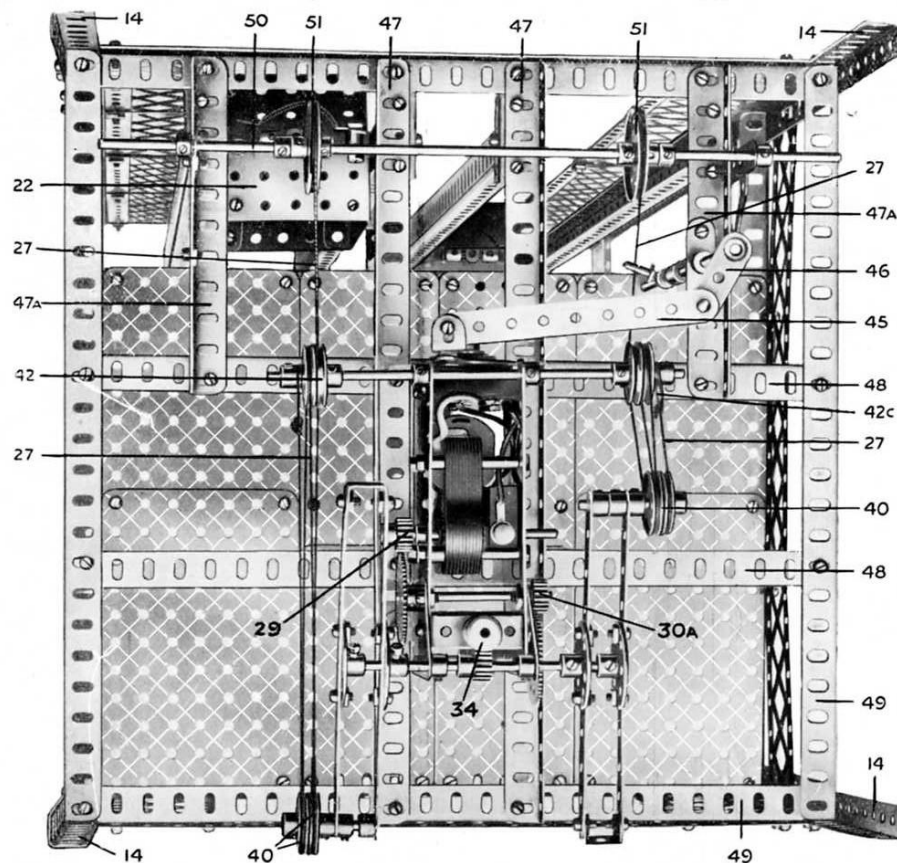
Plan view of Top Floor of Warehouse, with Roof removed to show the arrangement of the Electric Motor and the Lifting Mechanism.
